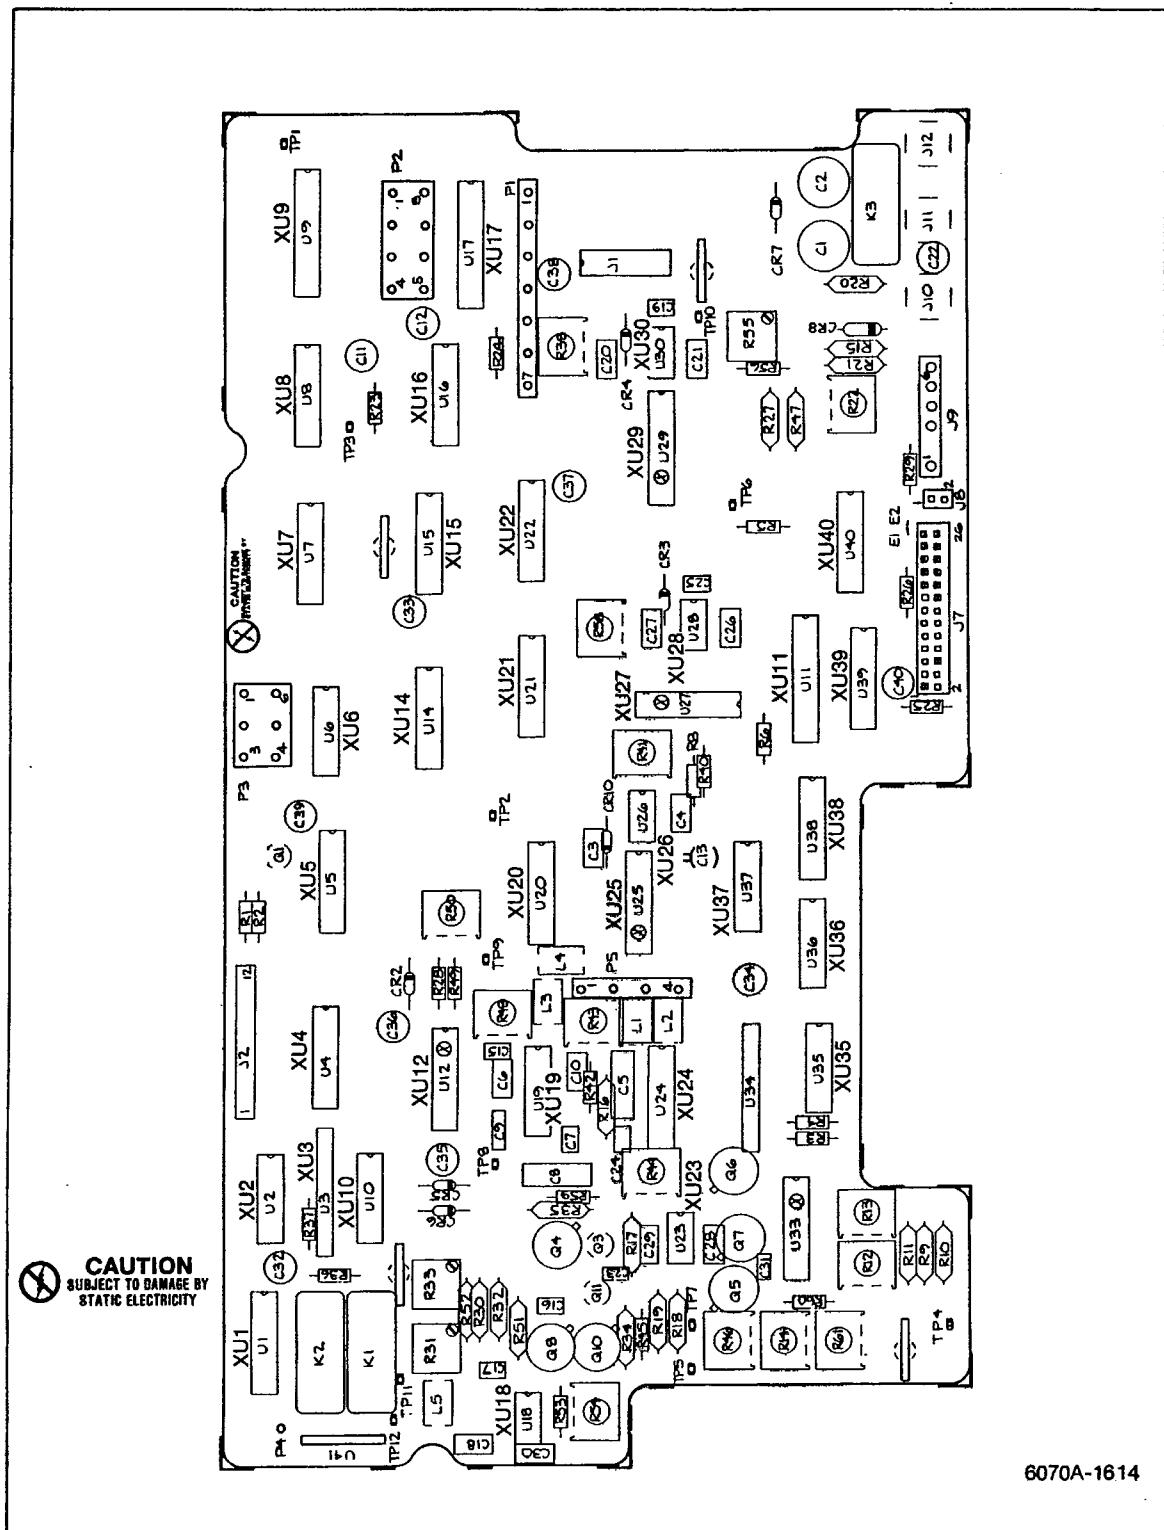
A4A10 Modulator Distribution PCB Assembly
